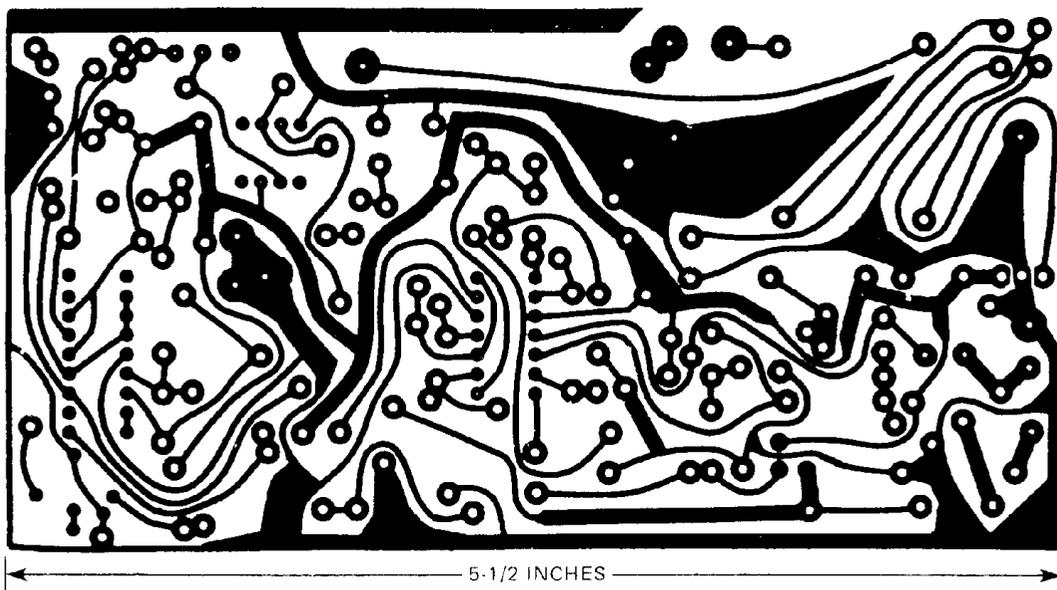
SINGLE SIDED PC BOARD contains sync corrector, RF modulator, and power supply.
